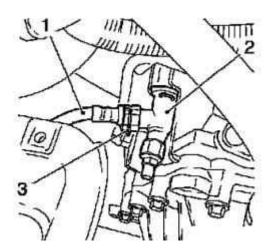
Removing the discharge line from the working cylinder clutch: 1 - flow line 2 - connector working cylinder clutch 3 - retention clamp
